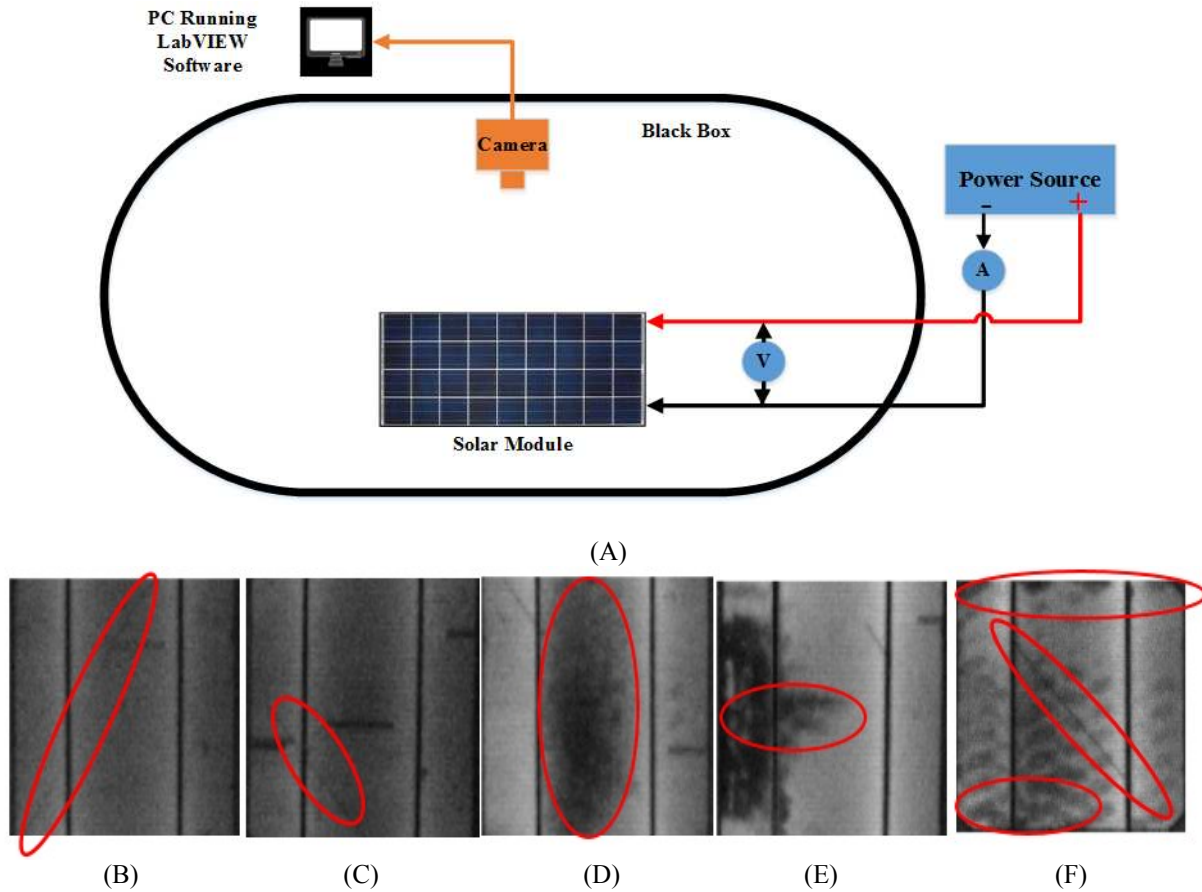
El Experimental Setup and Examined Crack Types. (A) Electroluminescence experimental setup; (B) Diagonal Crack (+45°); (C) Diagonal Crack (-45°); (D) Parallel to Busbars Crack; (E) Perpendicular to Busbars Crack; (F) Multiple Directions Crack
